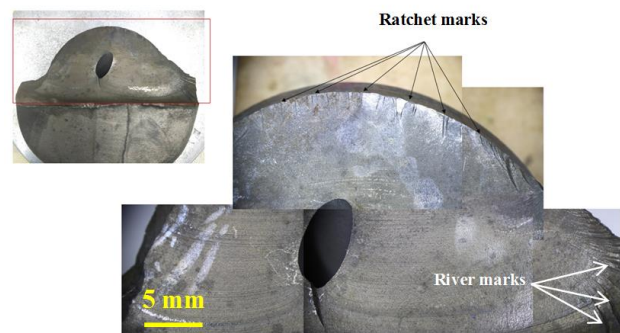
Fracture images of the crankshaft shows ratchet marks and river marks at 1x.
